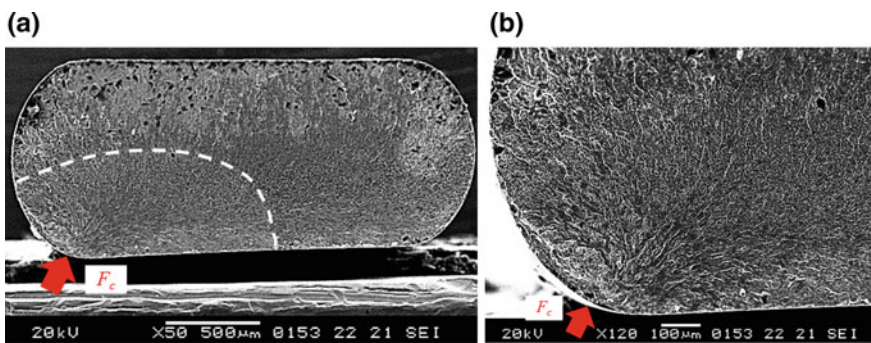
SEM photographs of fracture surface of USP tape with $d = 0.8$ mm and $c = 4000\%$ for $\varepsilon_a = 1.64\%$ and $N_f = 6788$: a whole fracture surface, b crack initiation part
